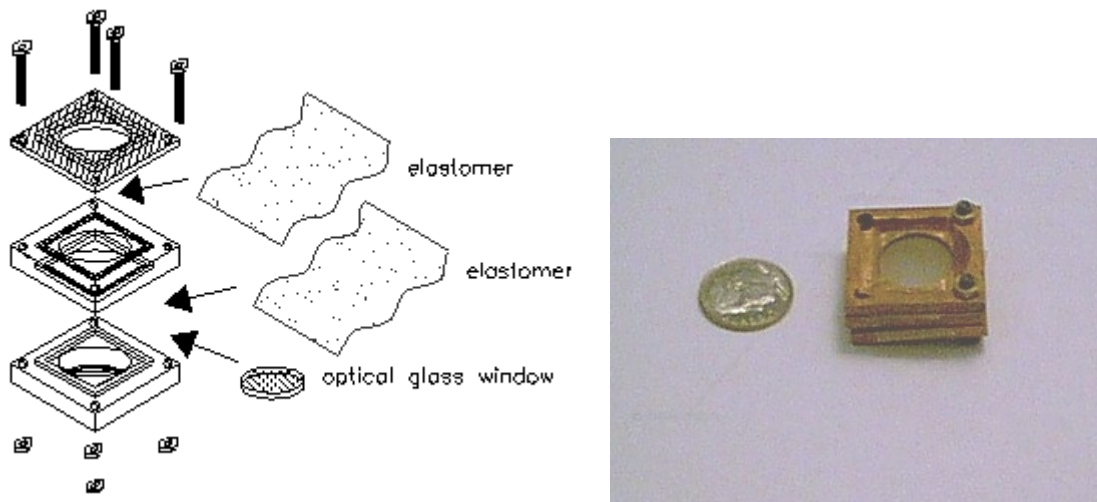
Assembly drawing and picture of the measurement cuvette.
